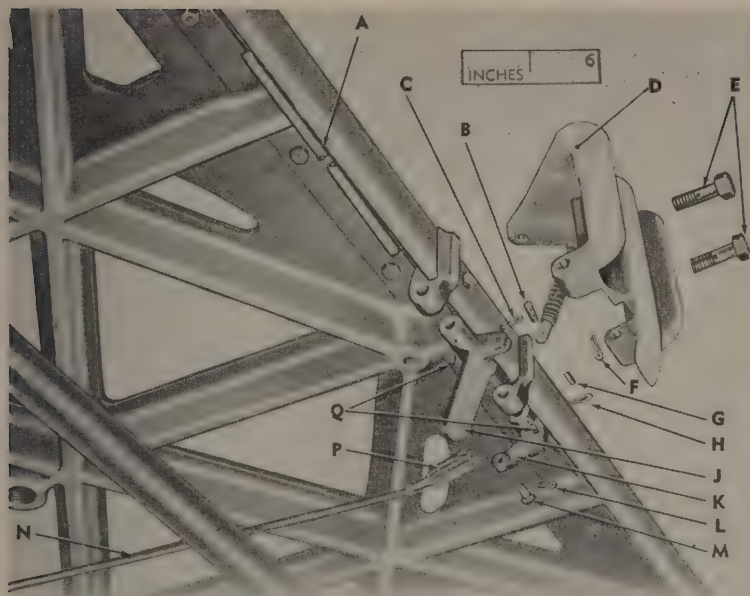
Removing platen from straight-base carriage assembly—sound-ranging plotting board M1 or M1A1.
